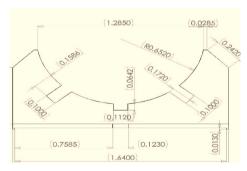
Hot block end view dimensioned drawing showing radius grooves and TEM flat surface recess.
